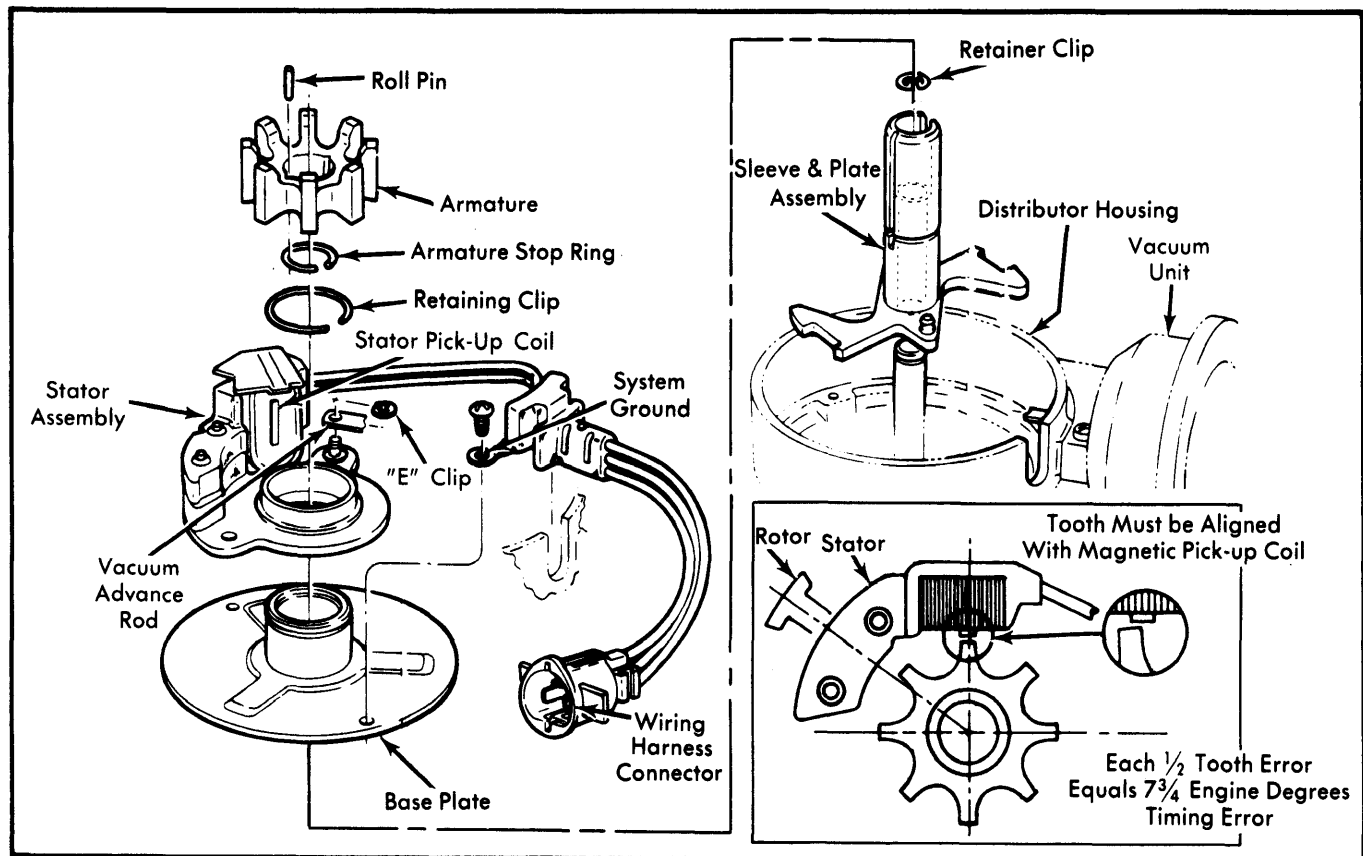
Components of Dura-Spark II Distributor (V8 Shown)
